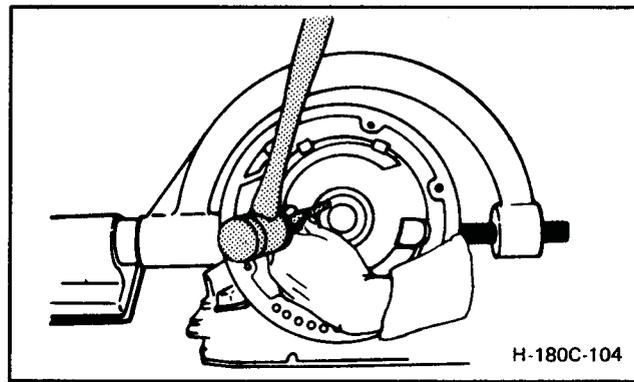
C-105 Removing Reaction Sun Gear Drum Bushing Sleeve
